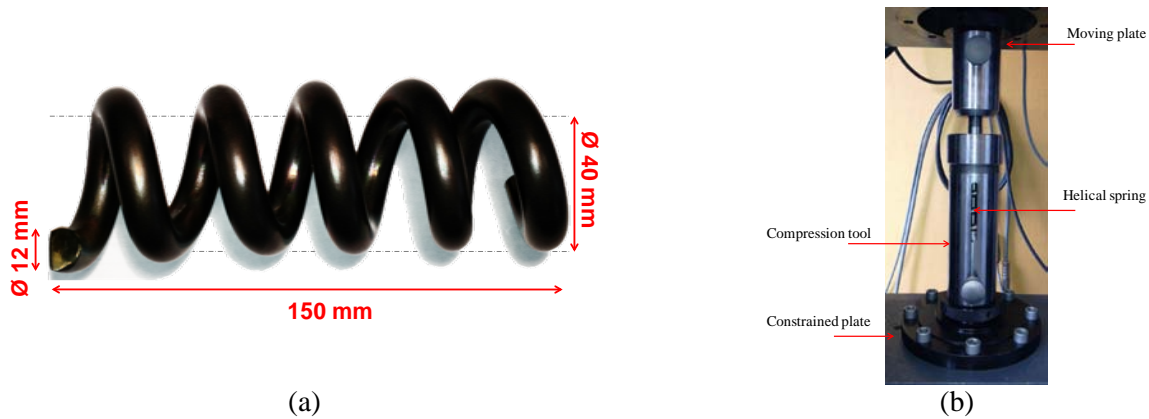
Design of the helical spring (a) and experimental compression tool (b).
